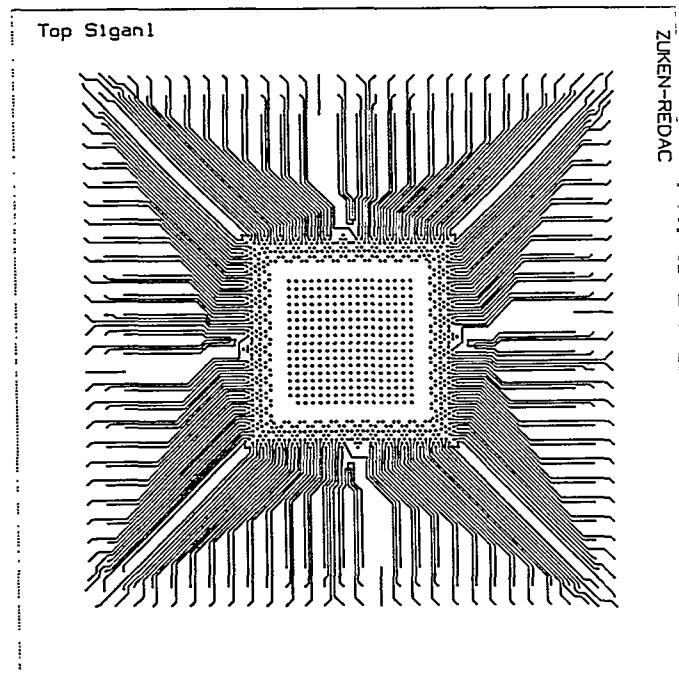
Top layer die pad layout and outer row escape routing of the Zuken-Redac layout of the 35 mm ATC4.2 BGA substrate. Flip chip pads for the 1004 I/O 250  $\mu\text{m}$  pitch die are in the center. The BGA array on the bottom contains 755 solder balls on 1.0 mm pitch.
